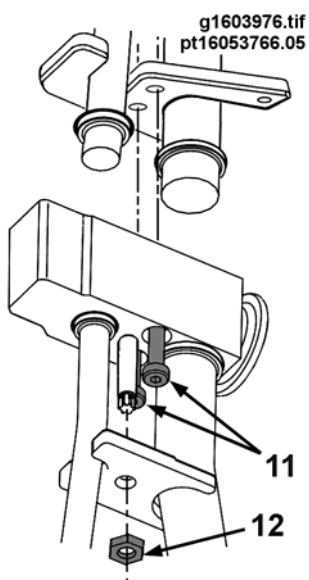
Torque Locations – Rear Thermostatic Expansion Valve (Figure 3 of 4)
